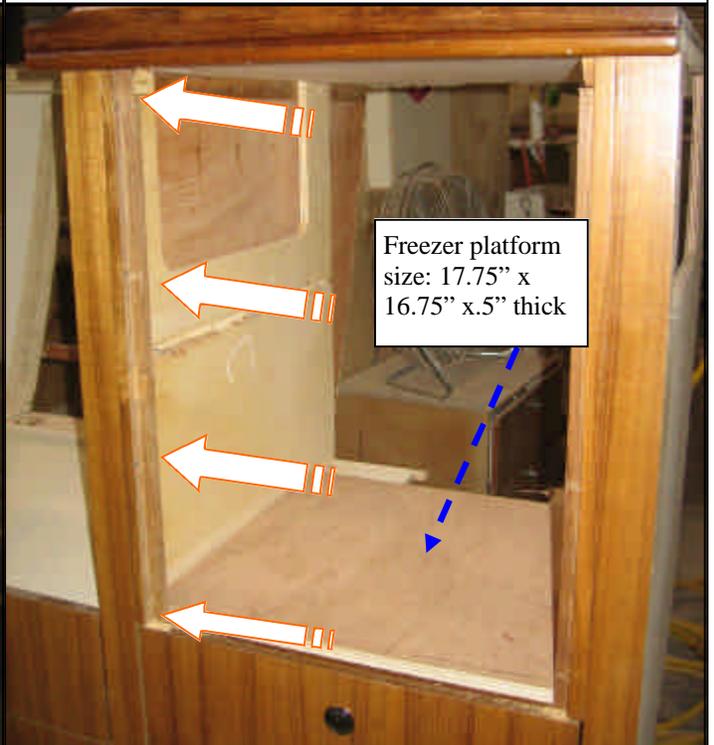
Mount & install wood part face trims on freezer compartment face panel, secure mounting screws as arrow indicated directions. Install freezer platform as shown illustration above.
